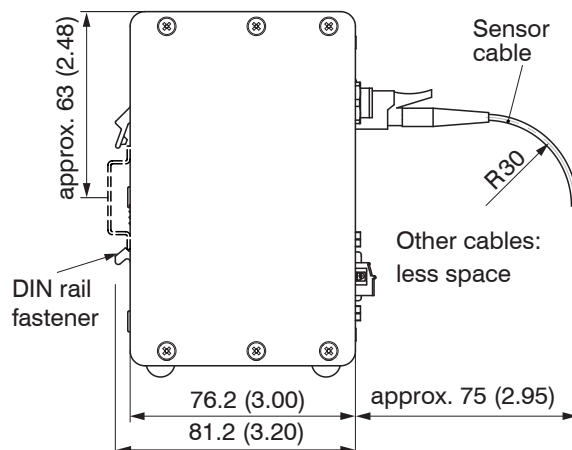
Dimensional drawing side view, controllers IFC2421/2422
